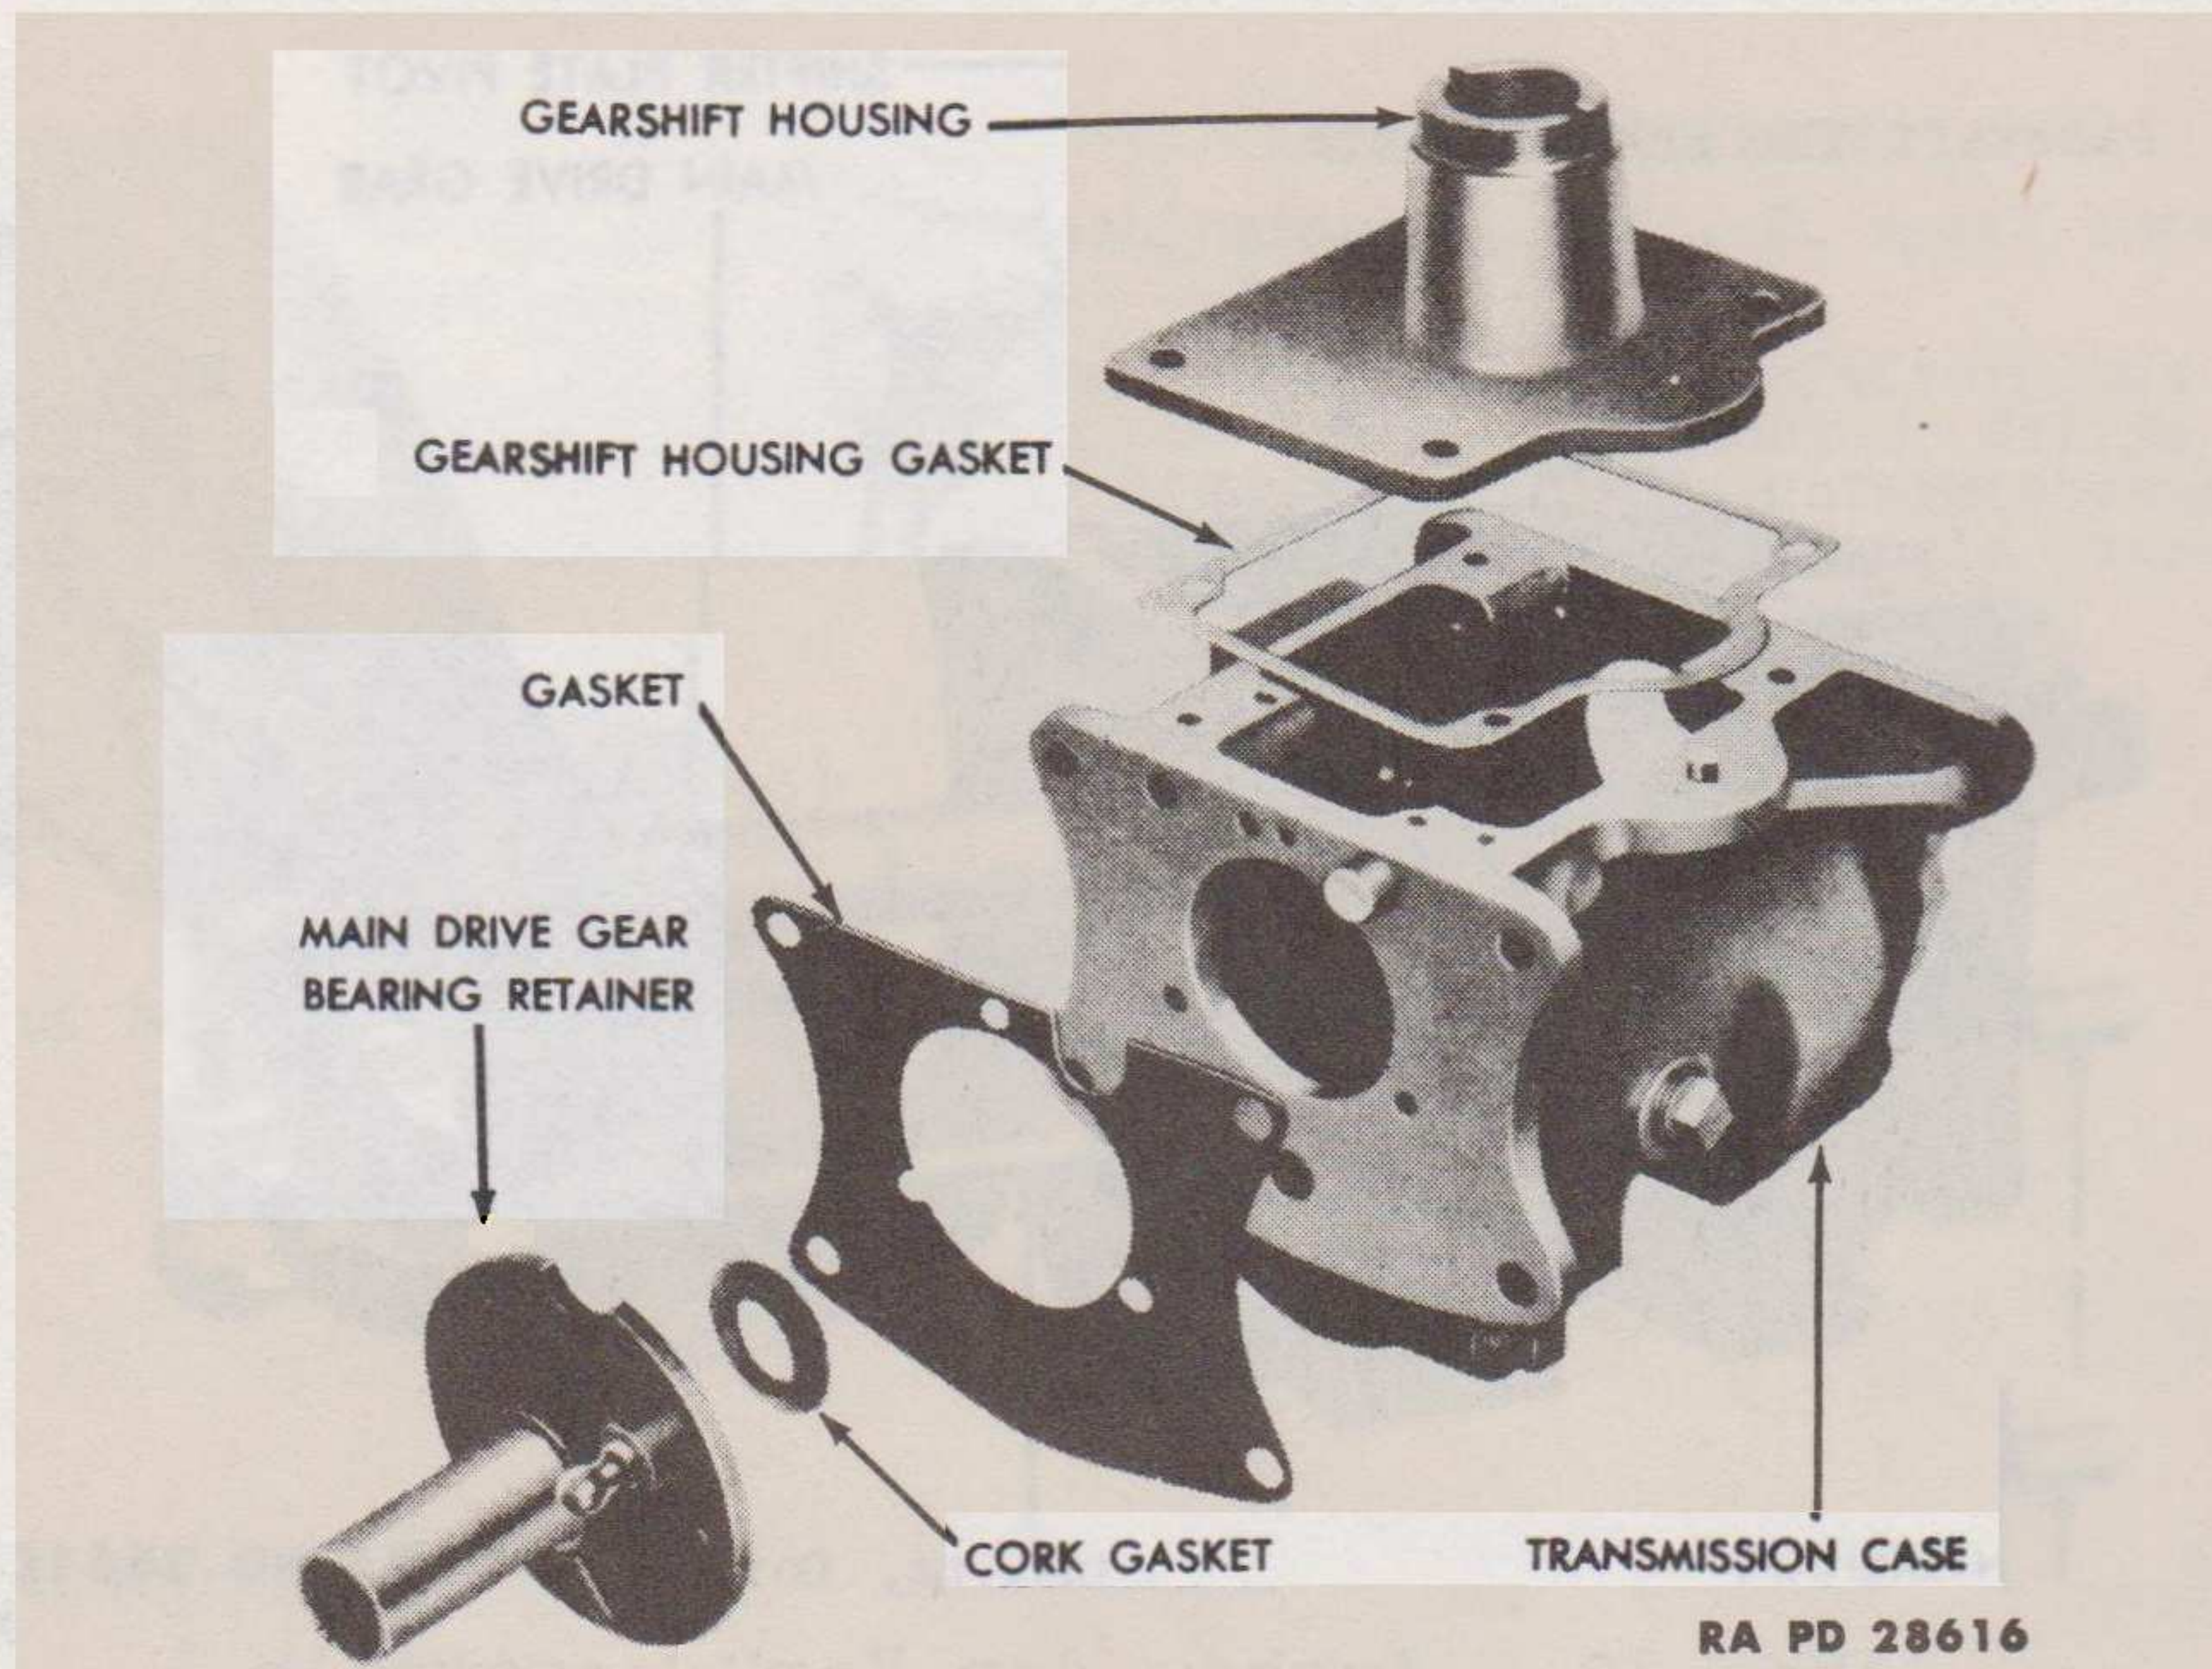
Transmission Case and Gearshift Housing — Exploded View
